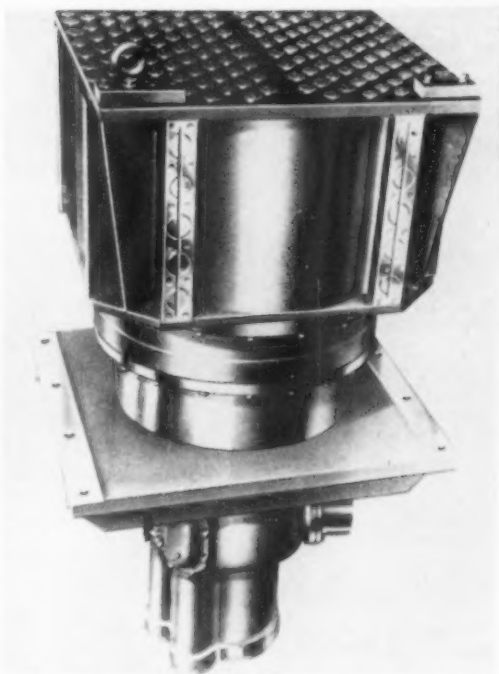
Pneumatic cushion with flat milled guideways in the bed used in larger left to right presses
